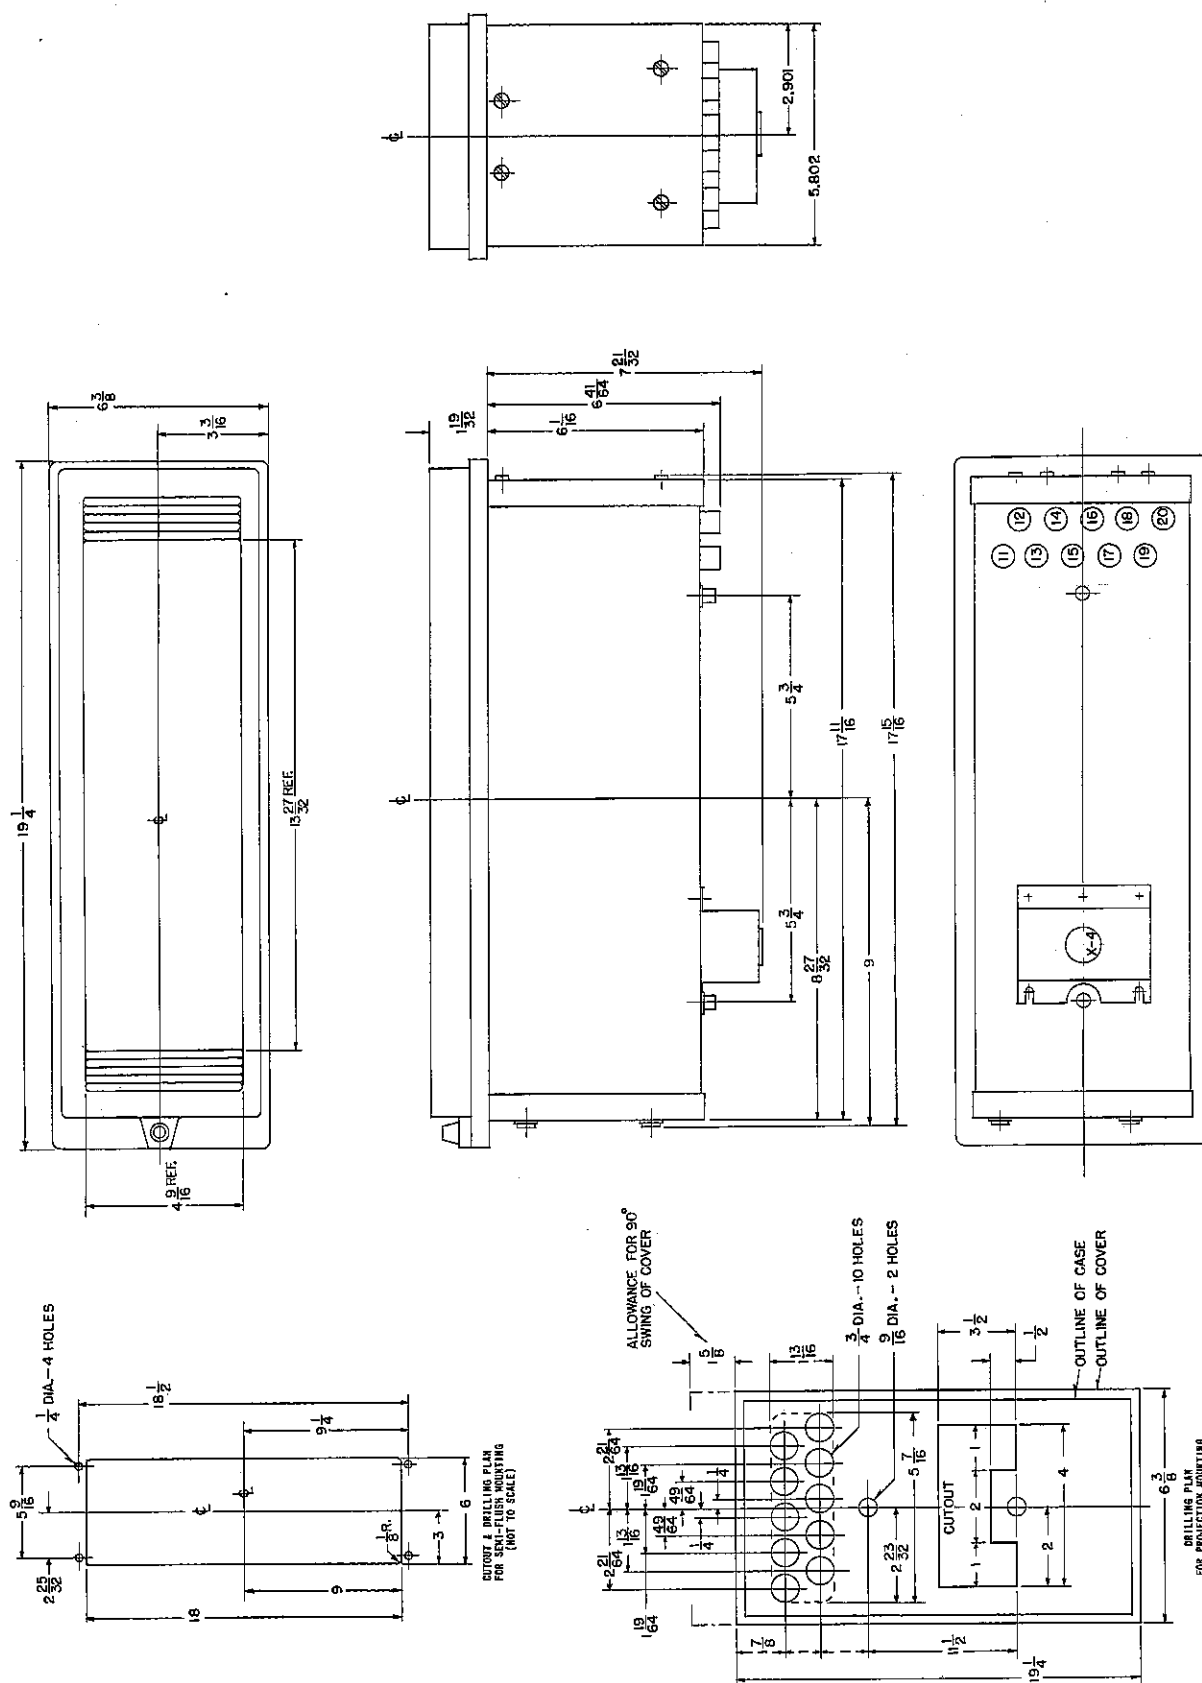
Outline Drawing, (Flexitest Case) (540D753)
